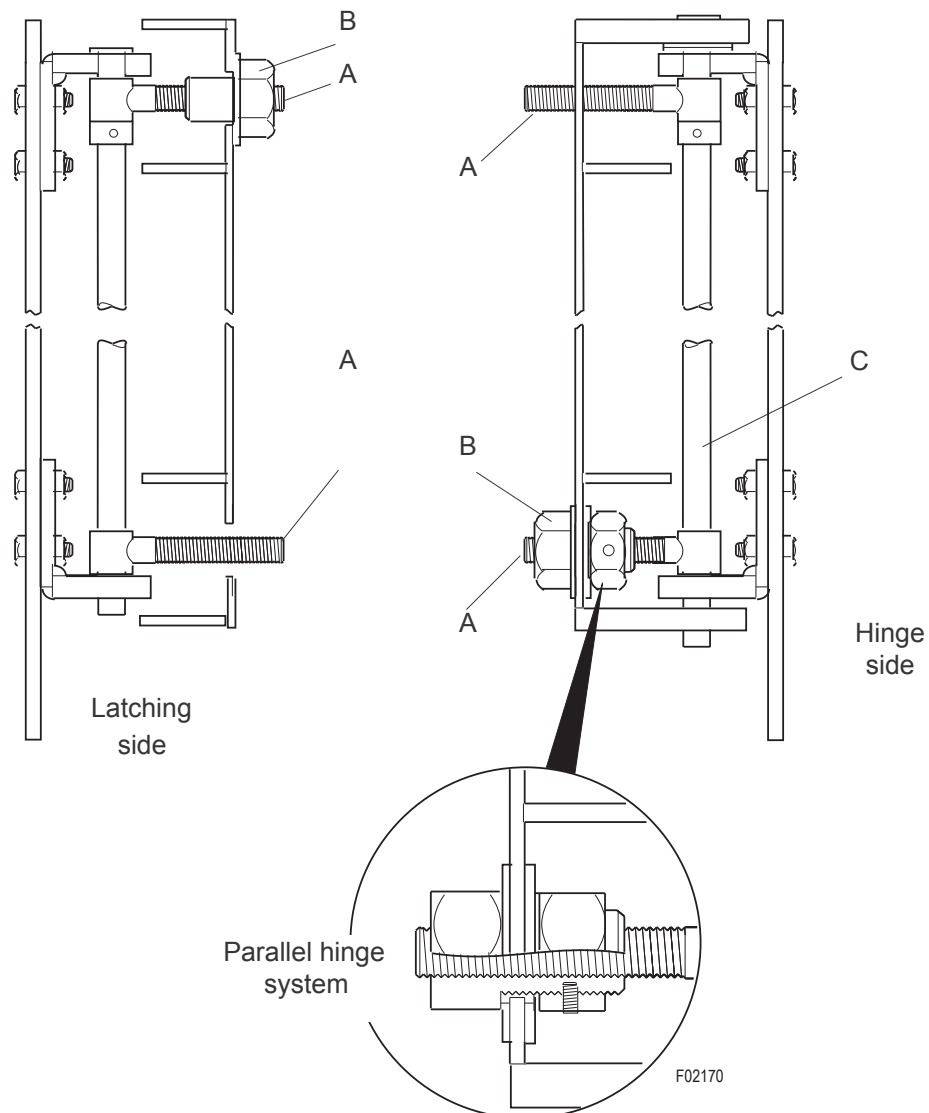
DOOR HINGE AND LATCH ASSEMBLY
